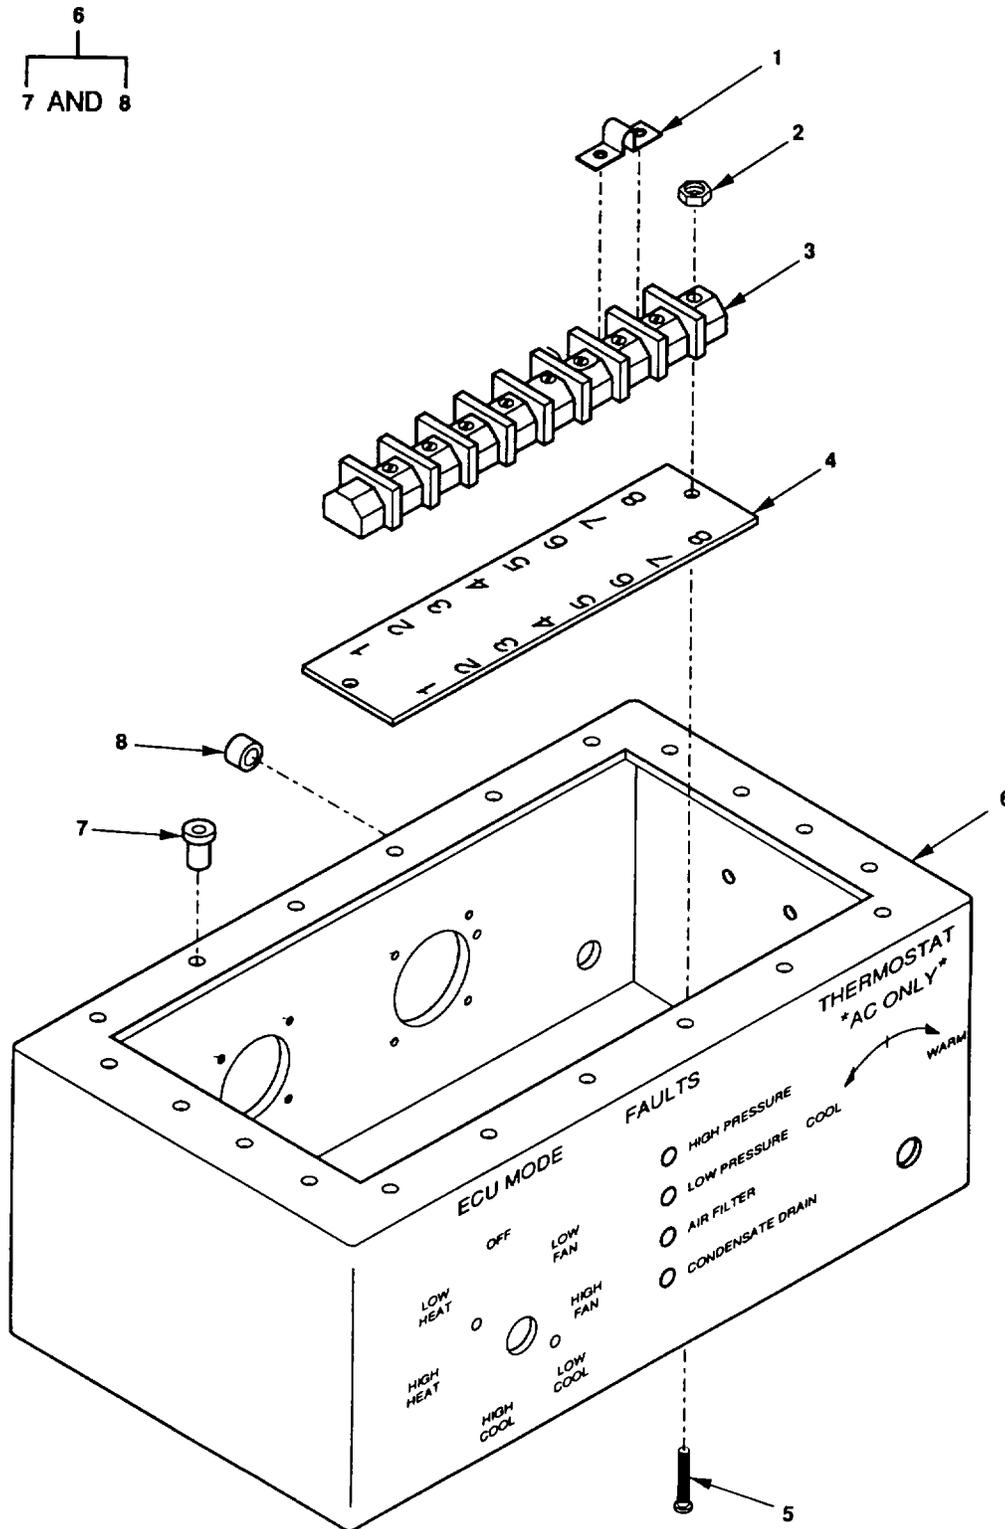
Bus Conductor, Terminal Board, Marker Strip, and Control Module Housing
